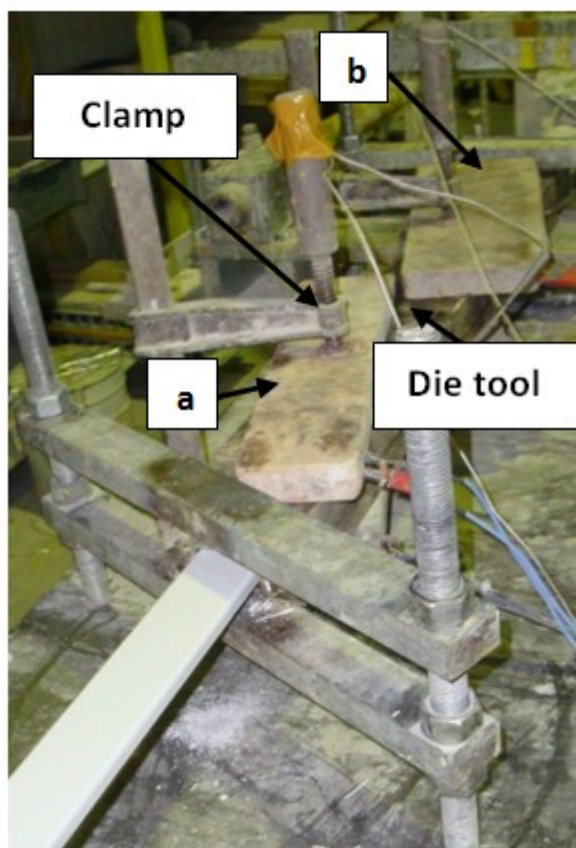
Initial set-up die with 800W plane heaters: (a) small and (b) large electrical resistance.
